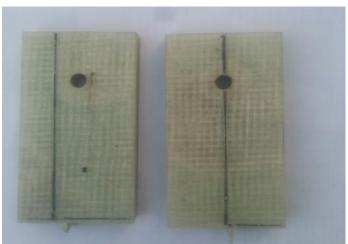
Machined Woven Glass Fabric Composite With Holes Drilled In Them.
